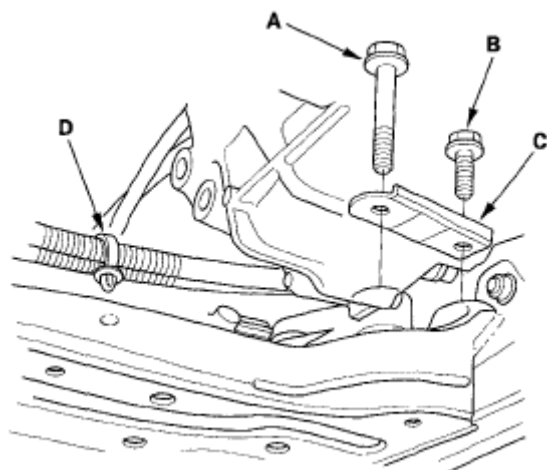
Identifying Stiffener Mounting Bolt And Stiffener
